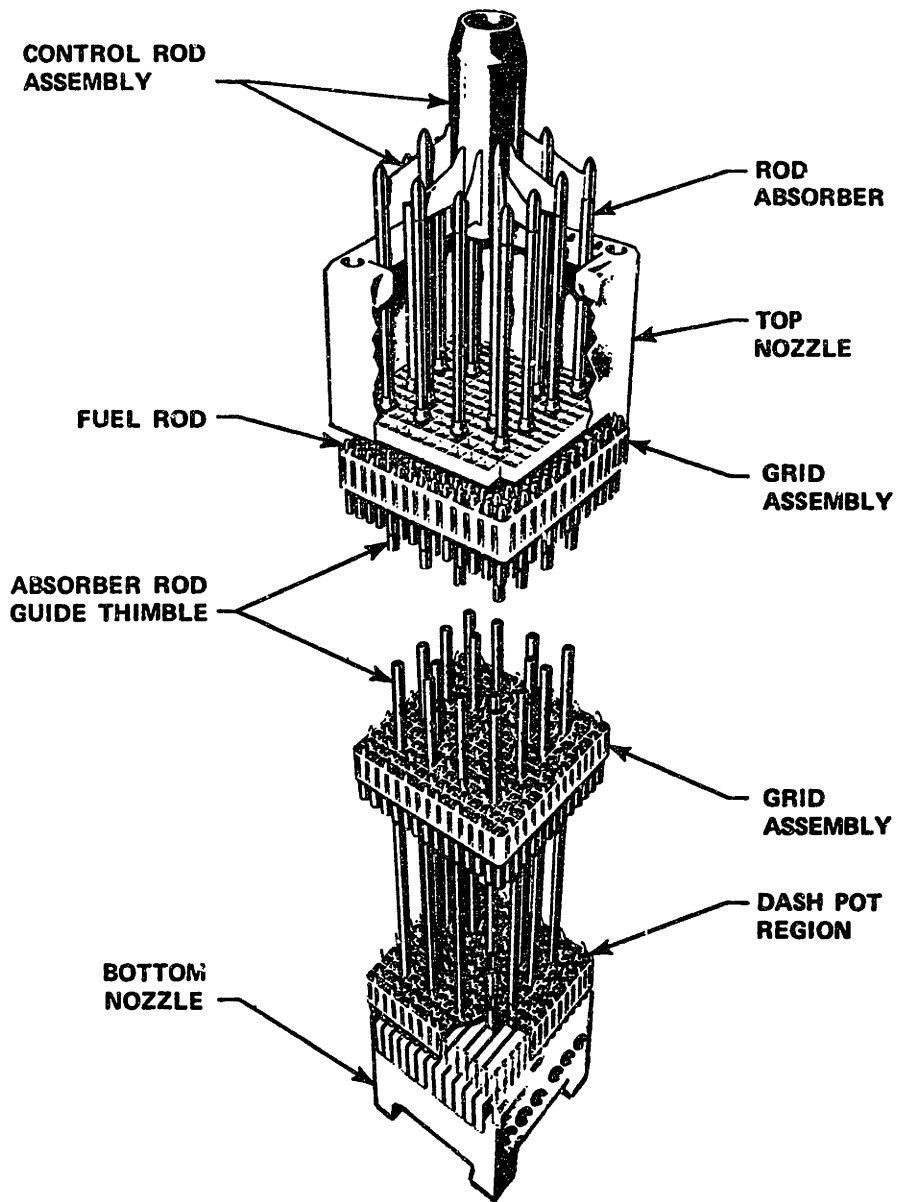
CUTAWAY OF TYPICAL ROD CLUSTER CONTROL ASSEMBLY OF STATIONARY PWP'S
